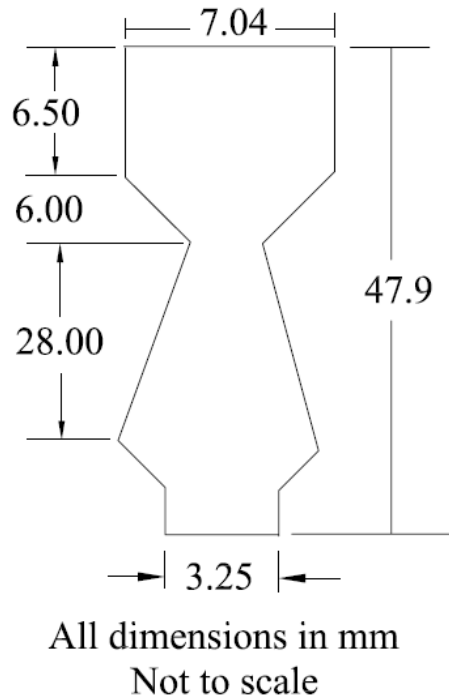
Nozzle dimensions used by Ariyapadi *et al.* [38].
